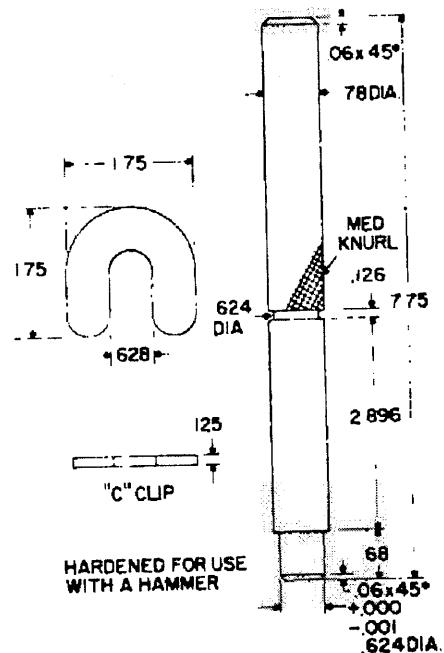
Drawing of a special tool that should be used for removal and installation of needle bearing (35—Fig. E2-33).
